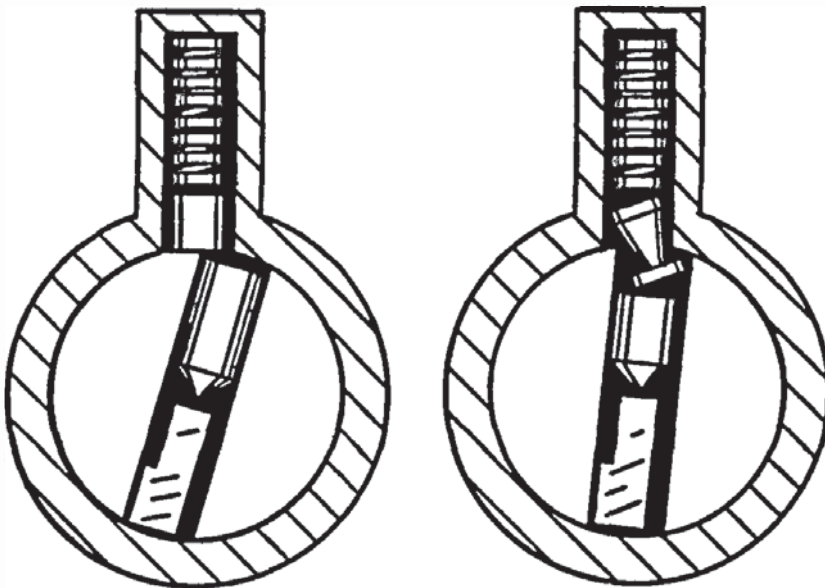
C. Standard pin tumbler cylinder (left) and mushroom pin tumbler cylinder.
